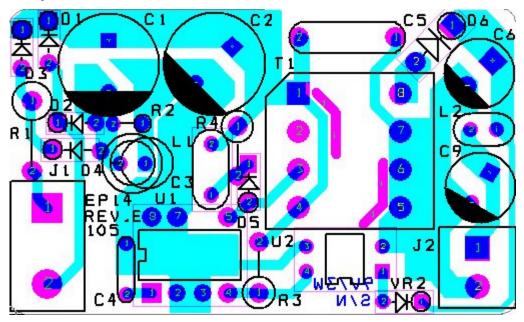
PCB Layout $(2.0 \times 1.2 \times 0.75")$
